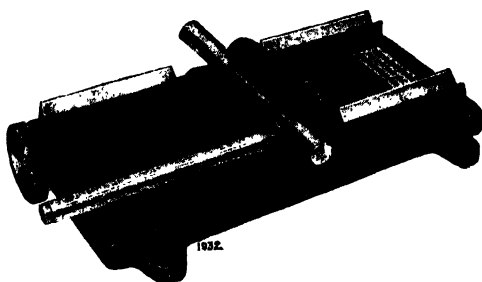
MARKING-OFF TOOL FOR 2 IN. GAUGE LENGTH
